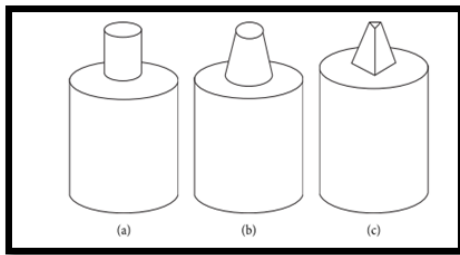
FSW tool. (a) Cylindrical, (b) Taper, (c) Triangular tool [45].
